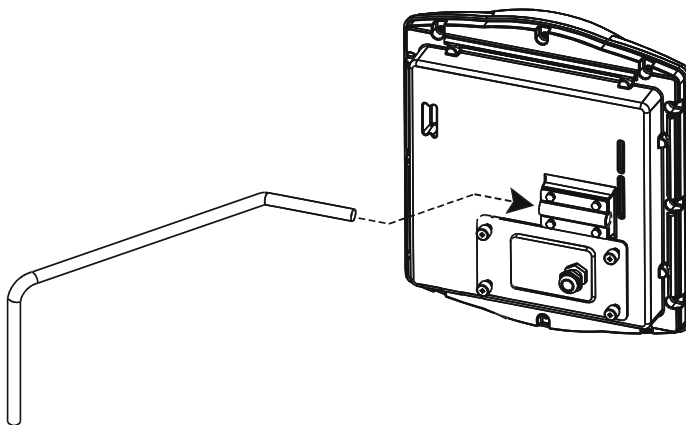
Rear-View of Pipe-Mounted xDR232
